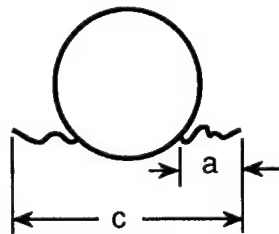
Drawing of Top Panel Surface With Rivet Head Defining  $a$  and  $c$ .
